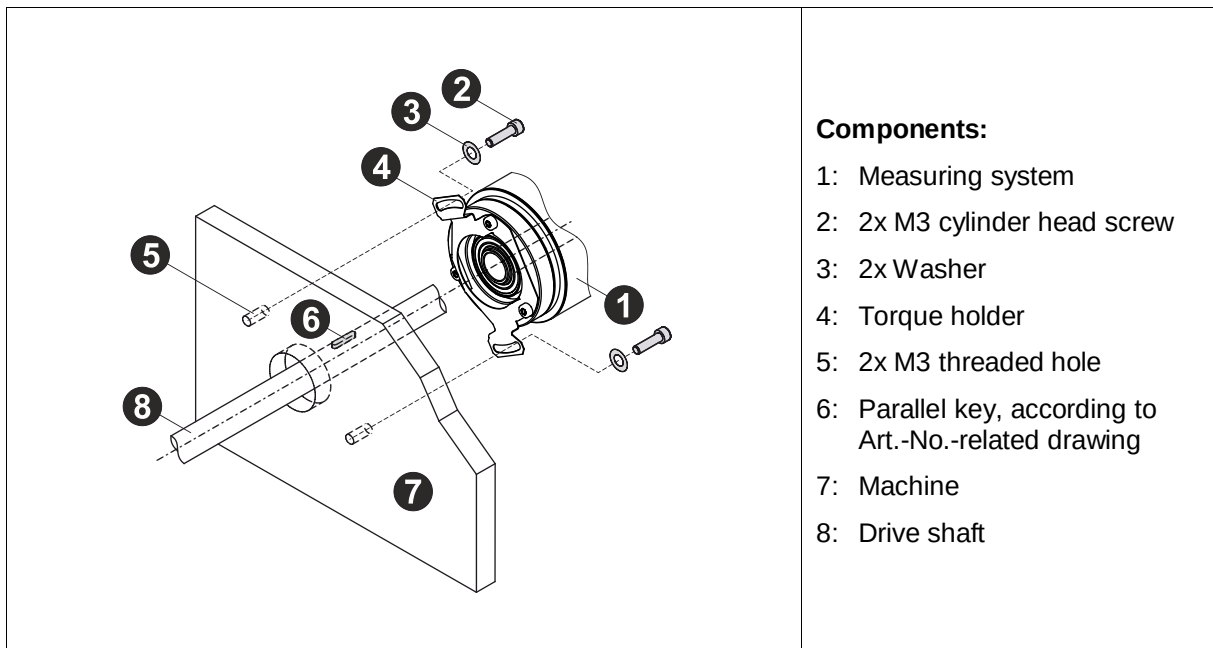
Mounting with torque holder (Spring metal sheet with two wings), principle illustration
